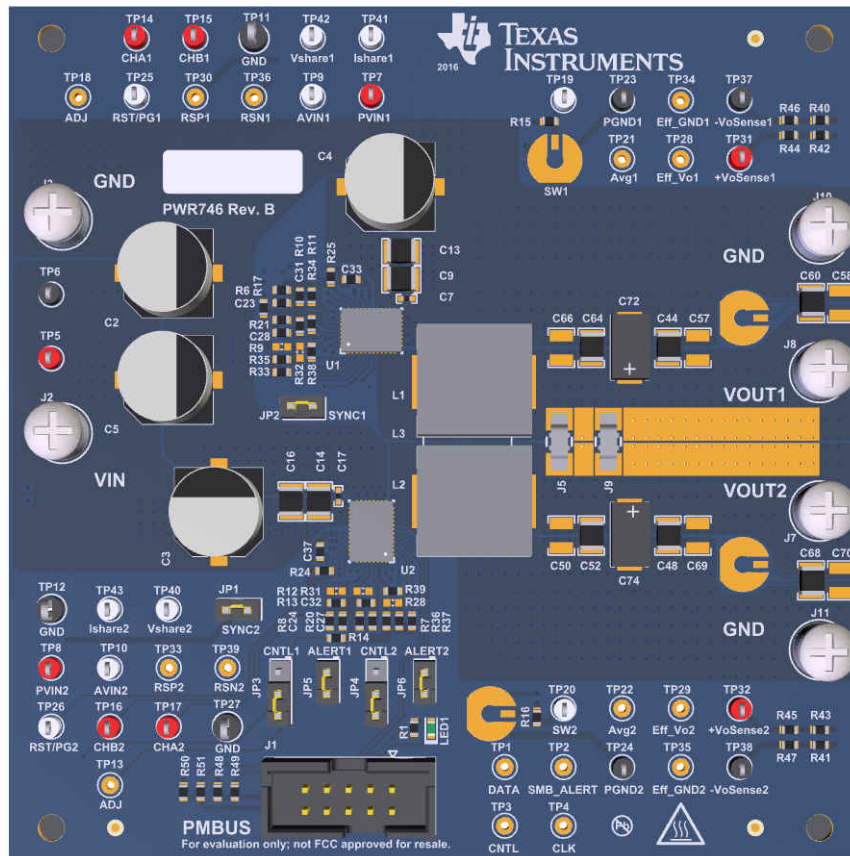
TPS546C23EVM2-746 EVM 3D (Top View)
